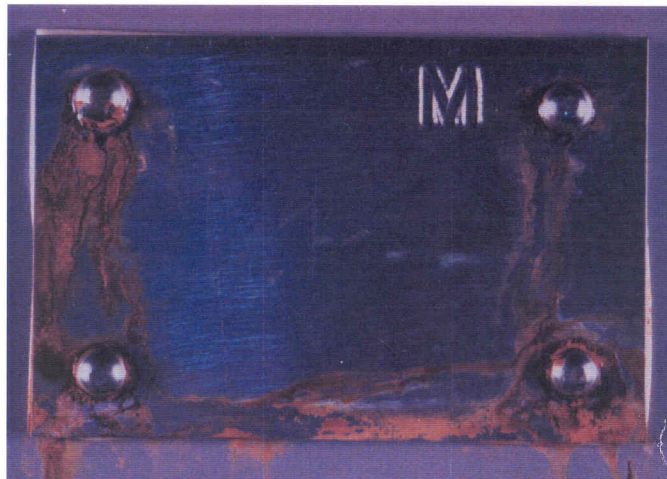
Monel 400™ label plate with 3M™ model 4946 double-sided tape, no sealant in fastener holes. Bulkhead panel has corroded at fastener attachment points resulting in running rust.
